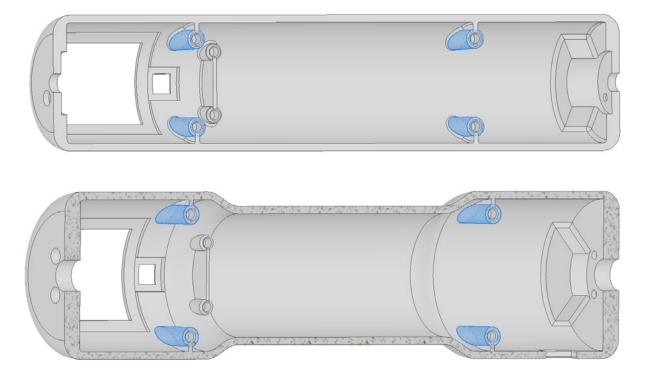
Handle assembly mounting bosses on option A (top) and option B (bottom) handles
